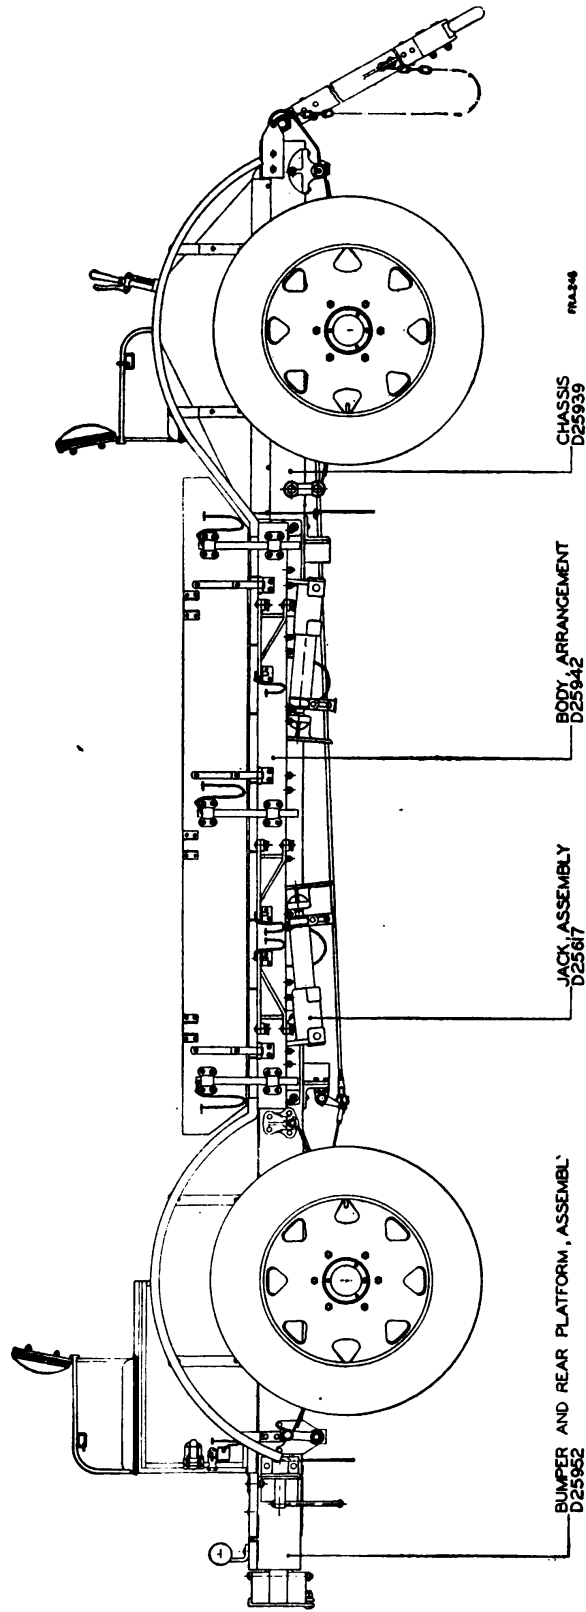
Sound locator trailer, M2A3—right elevation.
